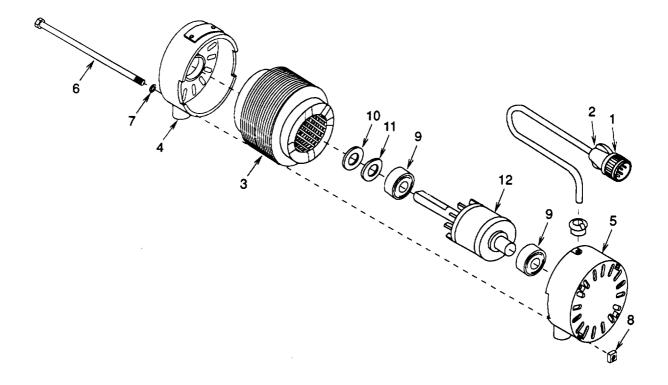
Condenser Fan Motor Assembly, Keco Industries, Inc., 3 Phase Motor, Model 13221 E9344-3K
